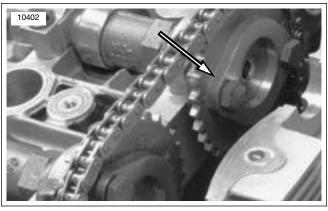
Spacer Boss on Outside (front cylinder cam sprocket)
